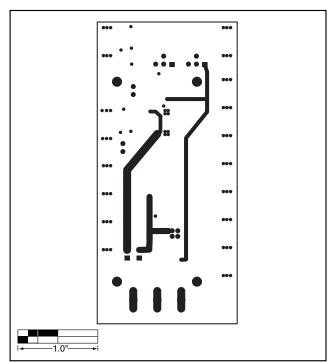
MAX3266 EV Kit PC Board Layout—Power Plane
